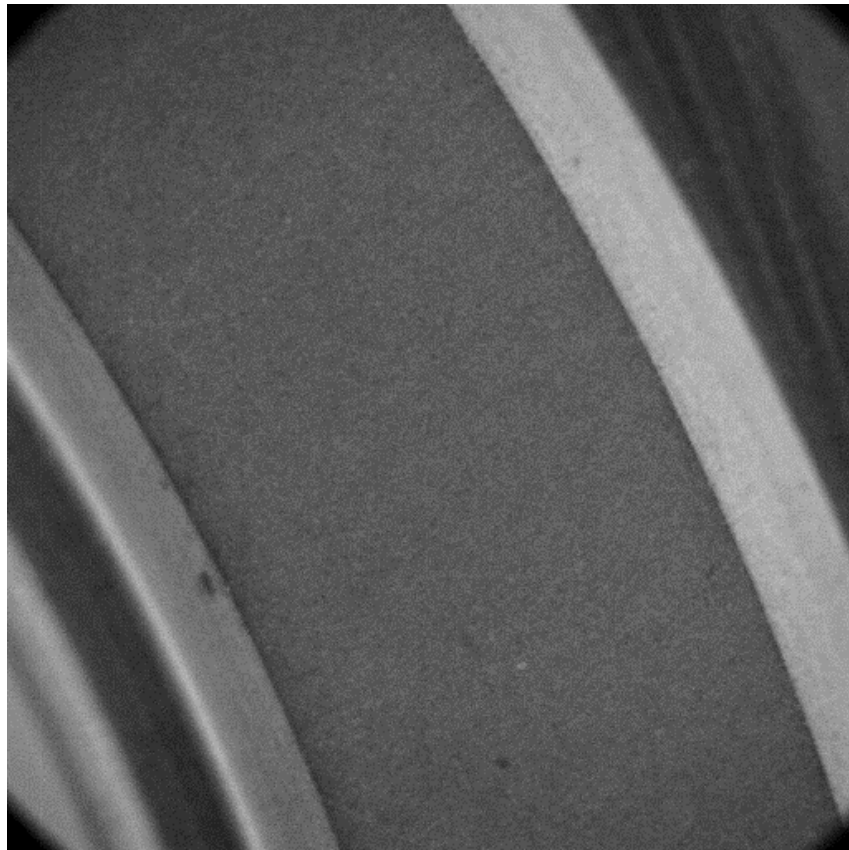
Sealing face on an intact specimen illustrating the initial condition.
